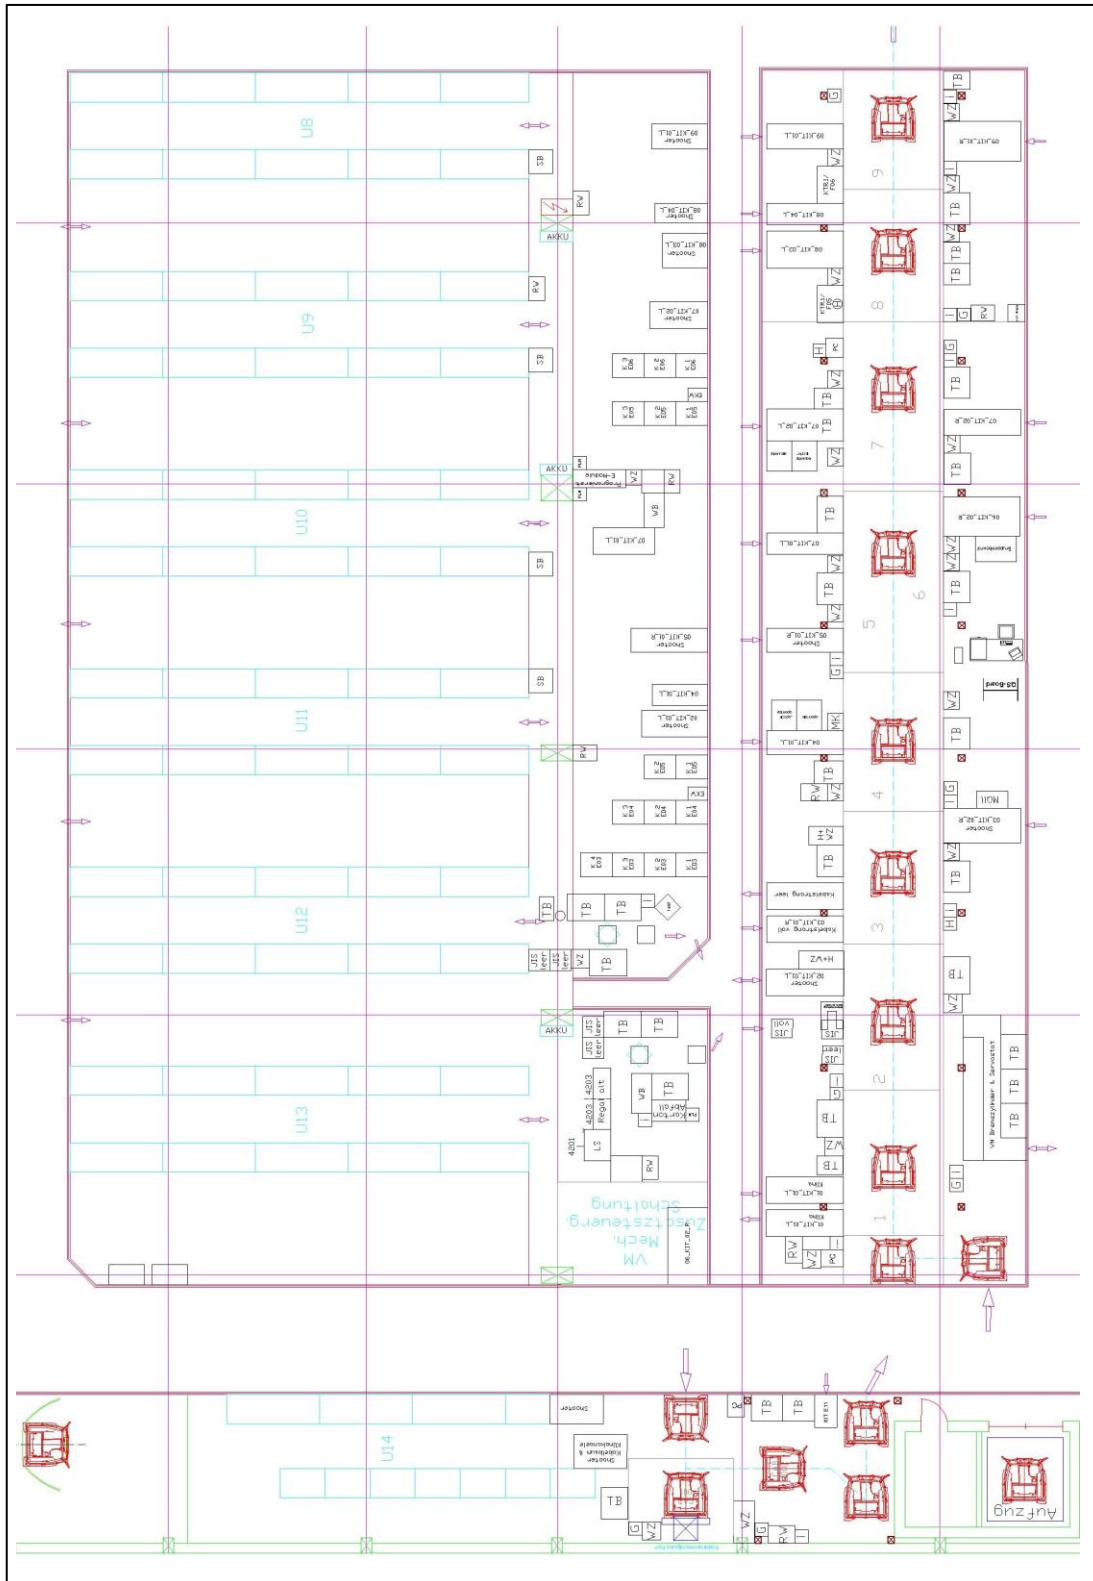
Final Shape of the Assembly Line after Phase 5<sup>137</sup>
